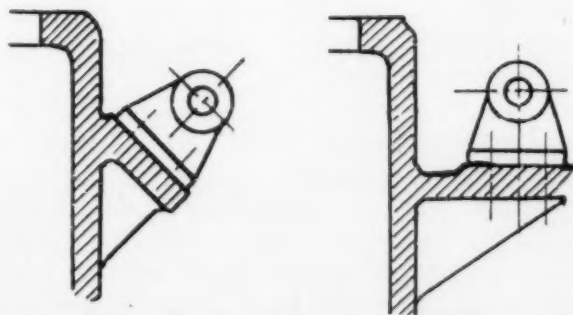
LOCATING SURFACES SHOULD BE HORIZONTAL OR VERTICAL. CORRECT DESIGN (LEFT) NOT INCLINED AS THIS WILL LESSEN DANGER OF INCORRECT ALIGNMENT.
